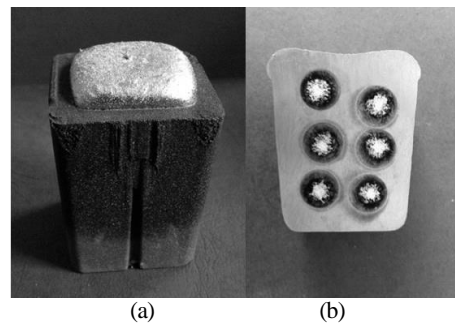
Aluminium alloy casting made into Quick-Cup mould: a) ingot; b) cross-section
